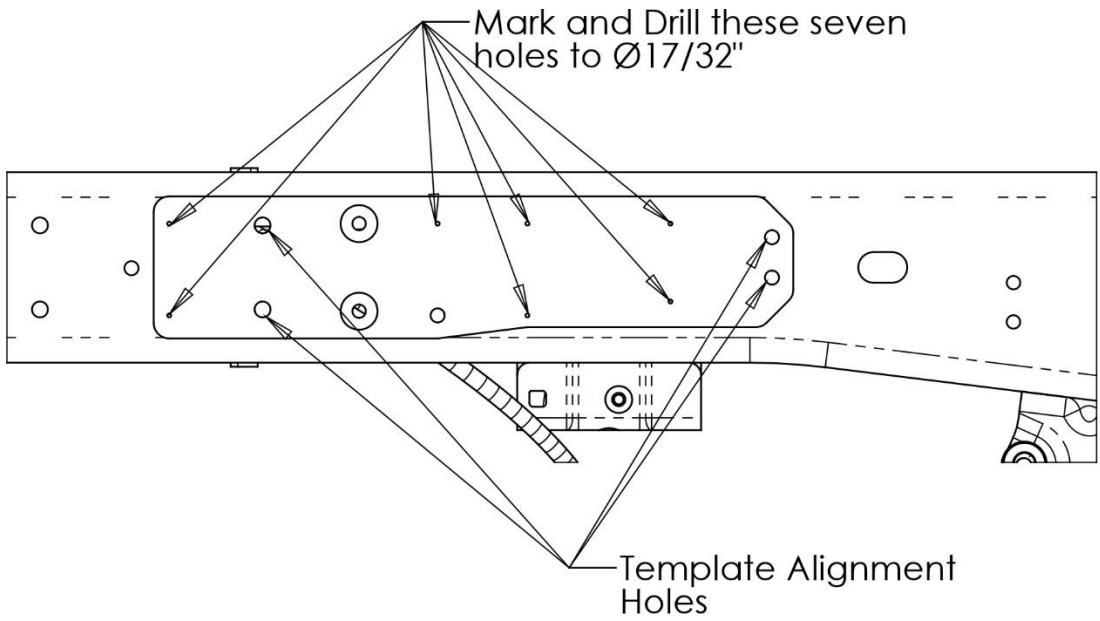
Passenger Side Upper Strut Mount Frame Drilling
